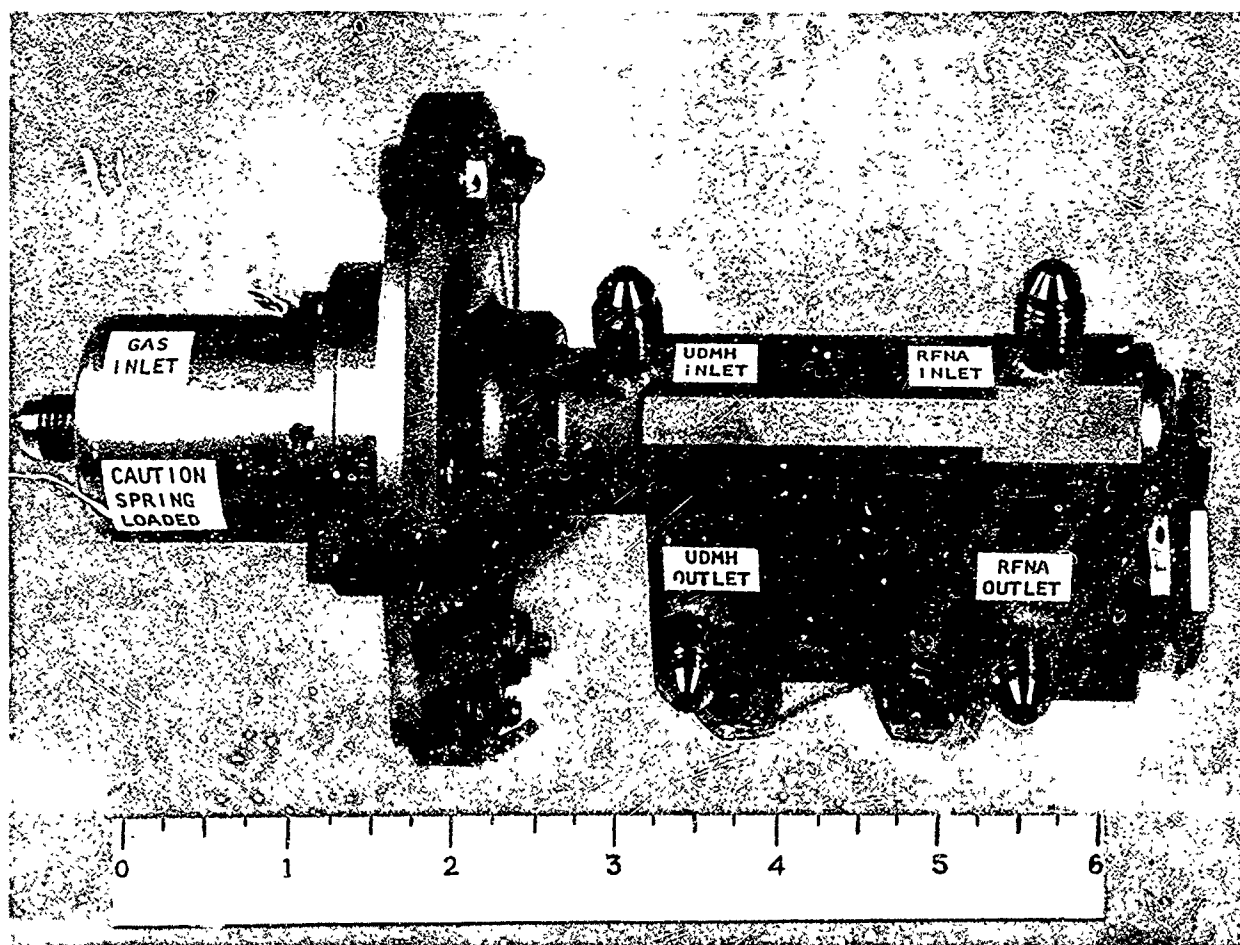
Hot Gas-Controlled Bipropellant Injector-Valve Assembly Hardware.
